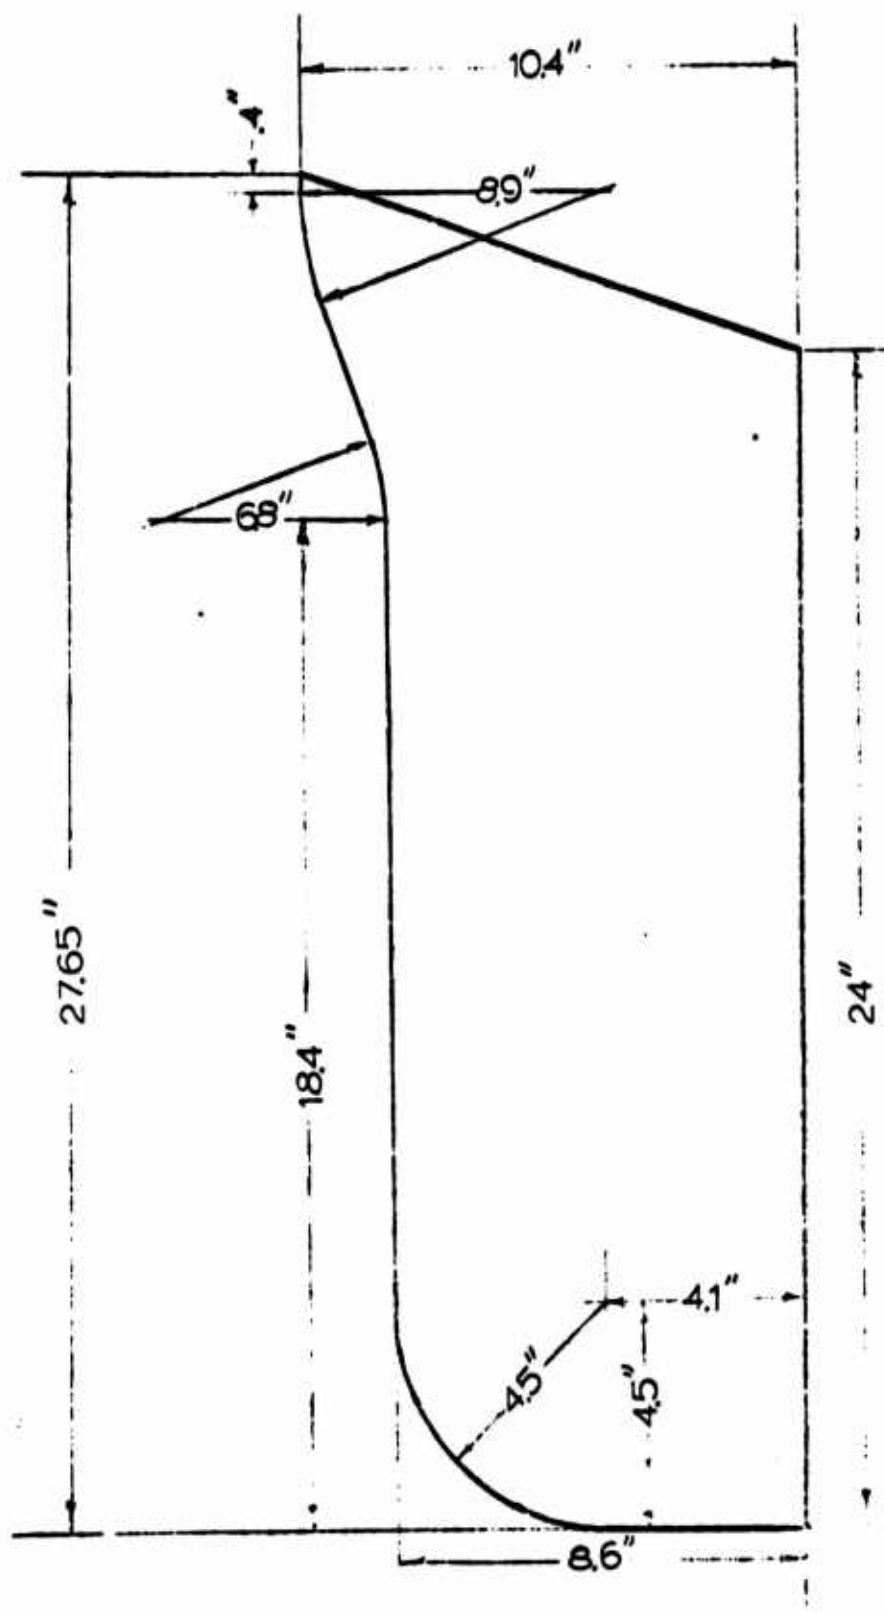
A Sketch of the Dimensions of the Power Jet Nozzle Piece.
